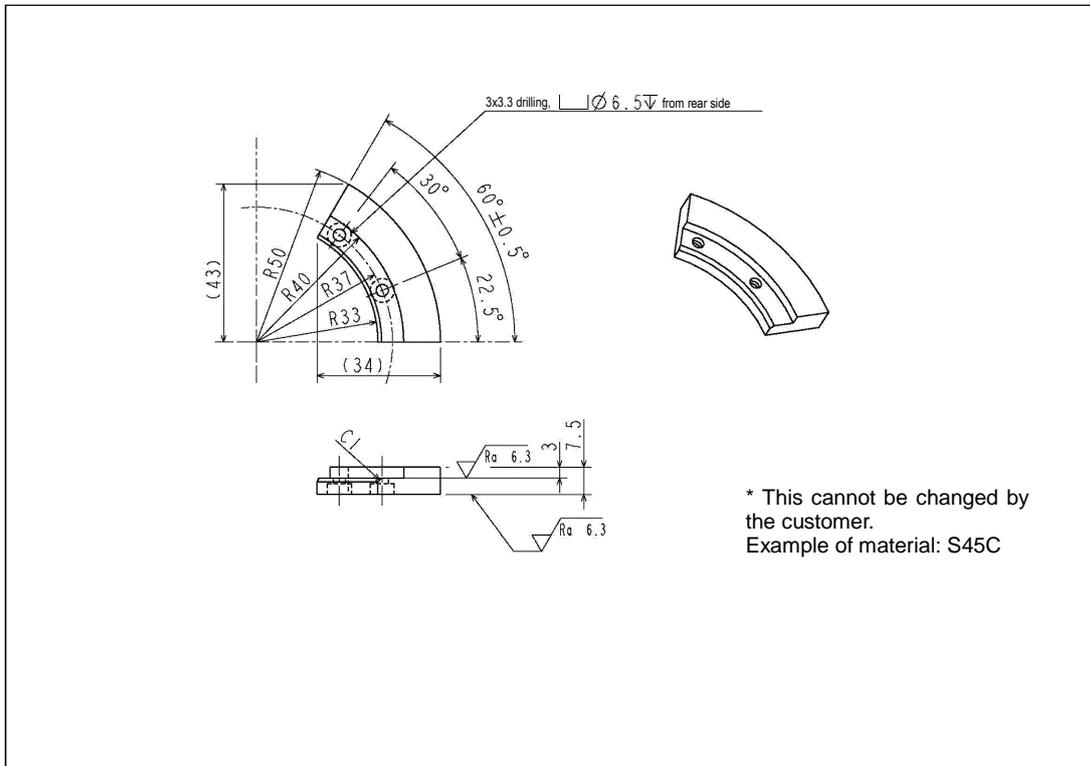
Arm 1 side mechanical stopper (TVL700)
